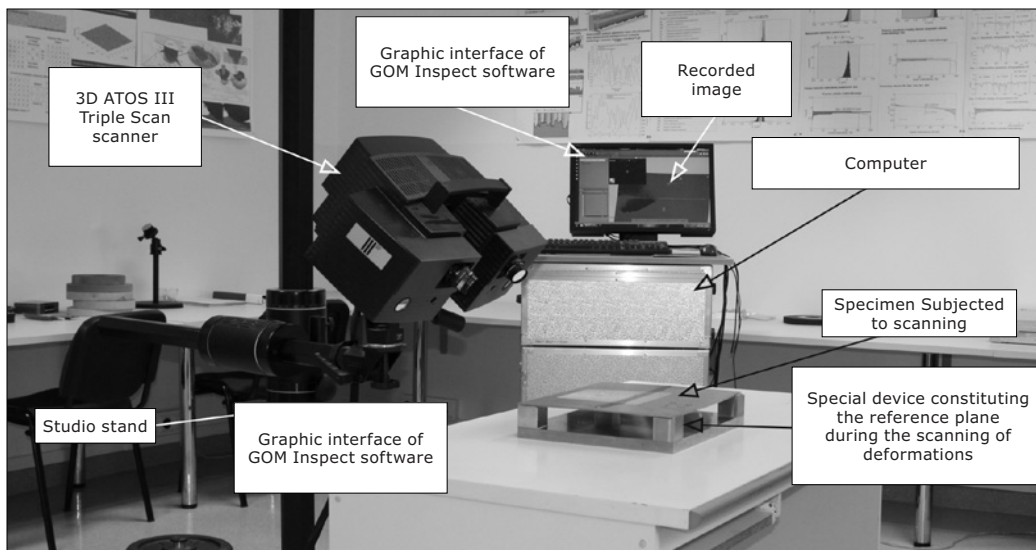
Station for non-contact measurements of welding strains equipped with a 3D ATOS III Triple Scan scanner (GOM)
